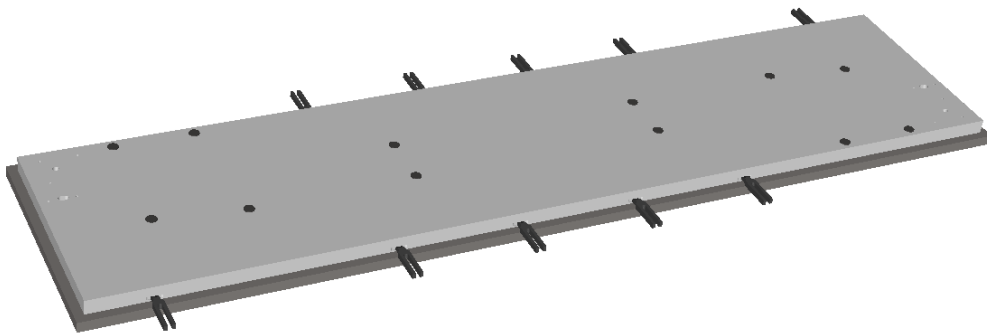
The fixture layout used for the first machining step: 12 screws and 10 clamps
